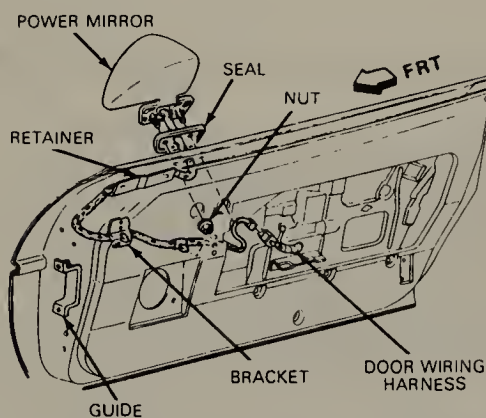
Outside power mirror mounting—1988 vehicle shown
